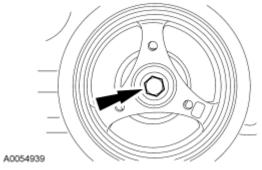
Crankshaft Pulley Bolt Courtesy of FORD MOTOR CO.
